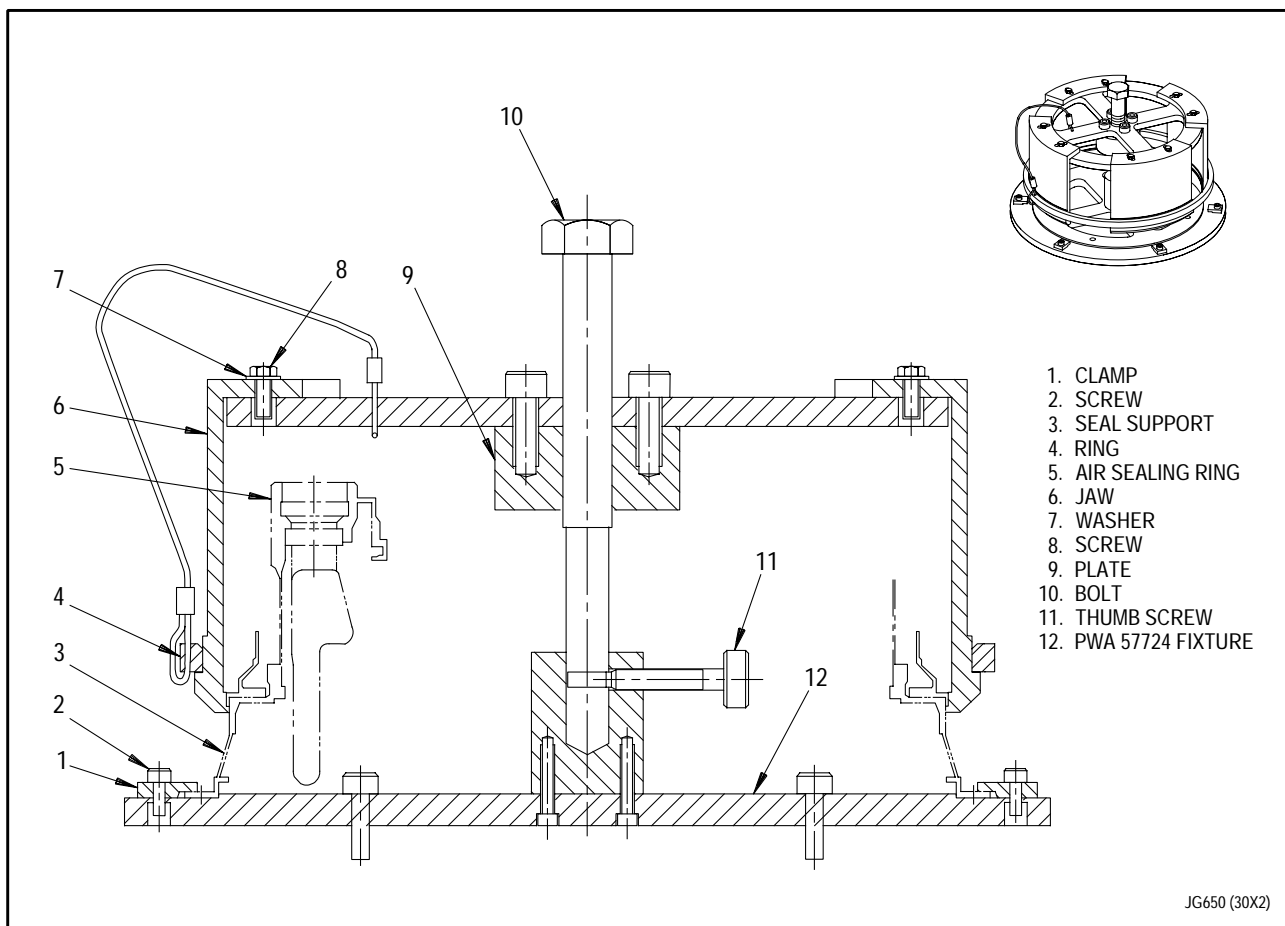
Front Air Sealing Ring and Seal Support - Disassembly With PWA 57724 Fixture
